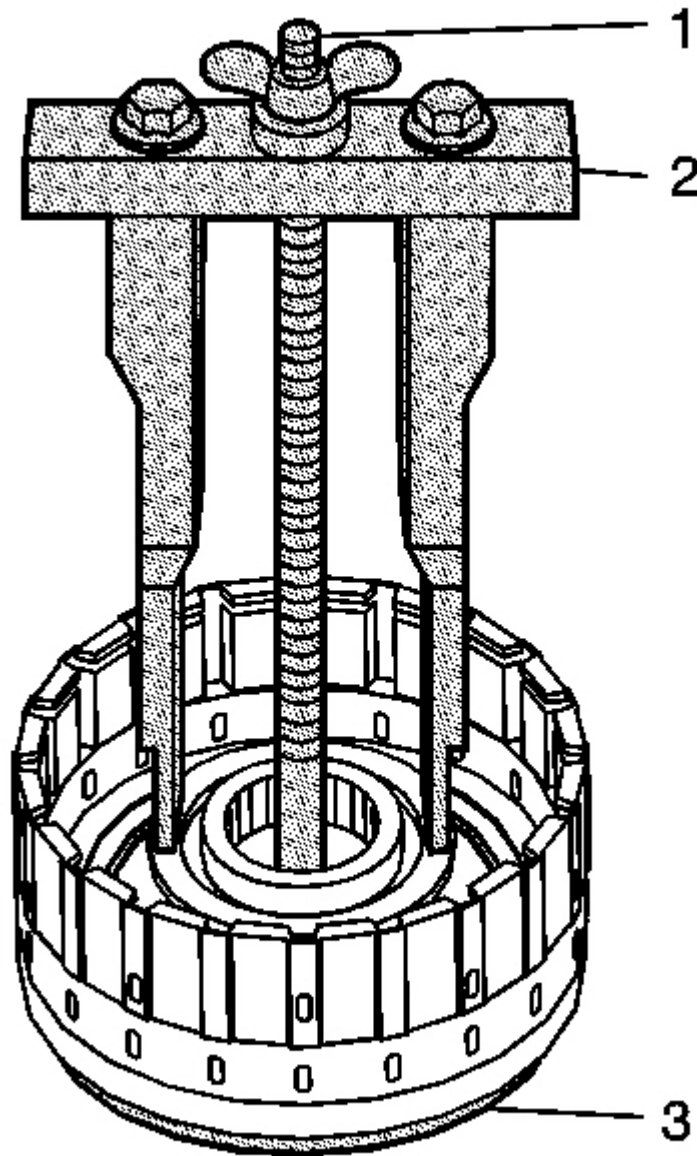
2nd Clutch Assemble, J 45124, J 23327, J 21420-2, Clutch Piston Return Spring & Clutch Spring Retainer Cap Retaining Ring
